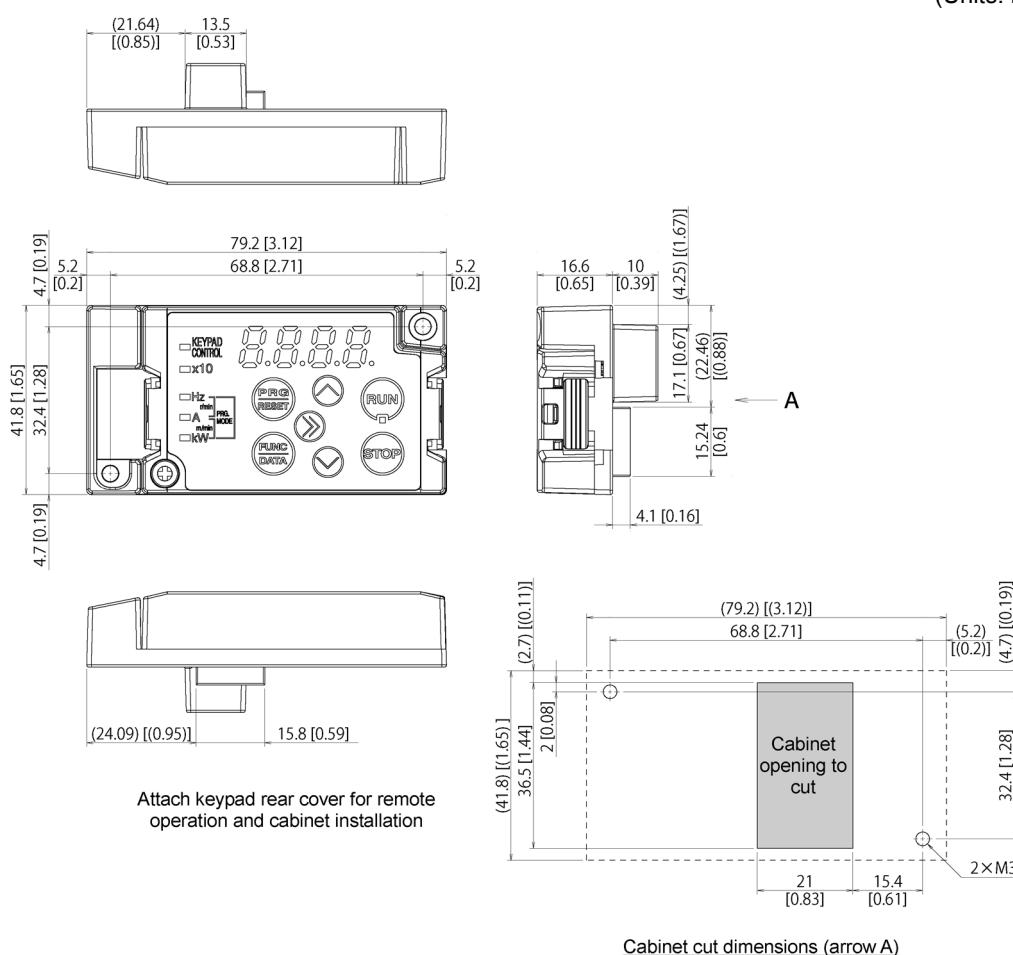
Fixing Screw Positions and the Dimensions of the Cabinet to Cut
